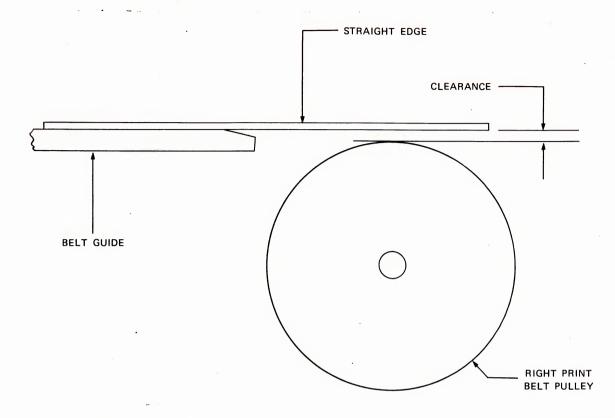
Magnetic Belt Guide Horizontal Adjustment
